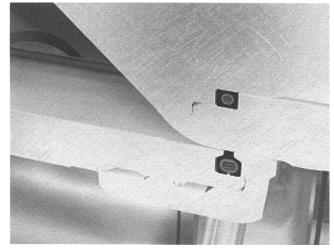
Axial piston valve sealing details (patented) Courtesy of Mokveld Valves BV
